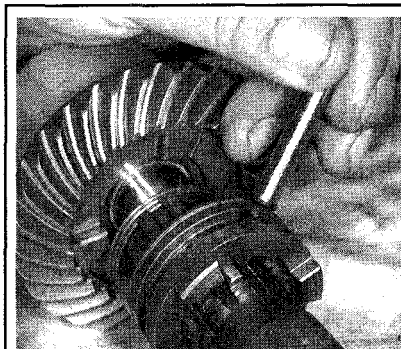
Push the shift shaft retaining pin out from the clutch dog.
